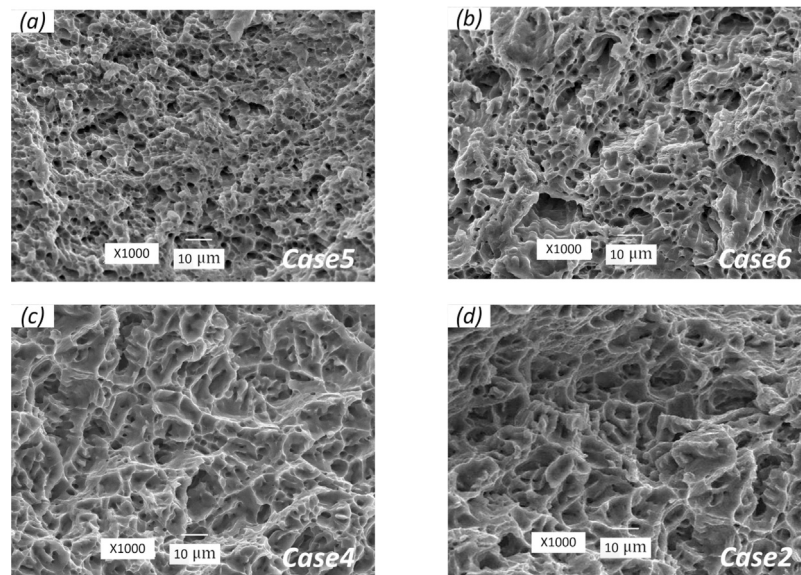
Fracture surfaces of the laser beam welded joints of 2A14-T6 aluminum alloy.
